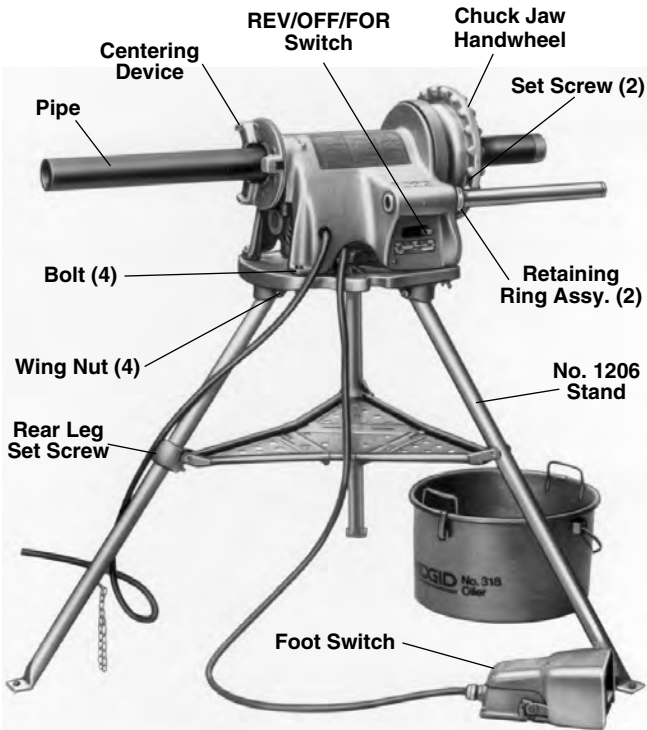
300 Power Drive Mounted on No. 1206 Stand with 418 Oiler
